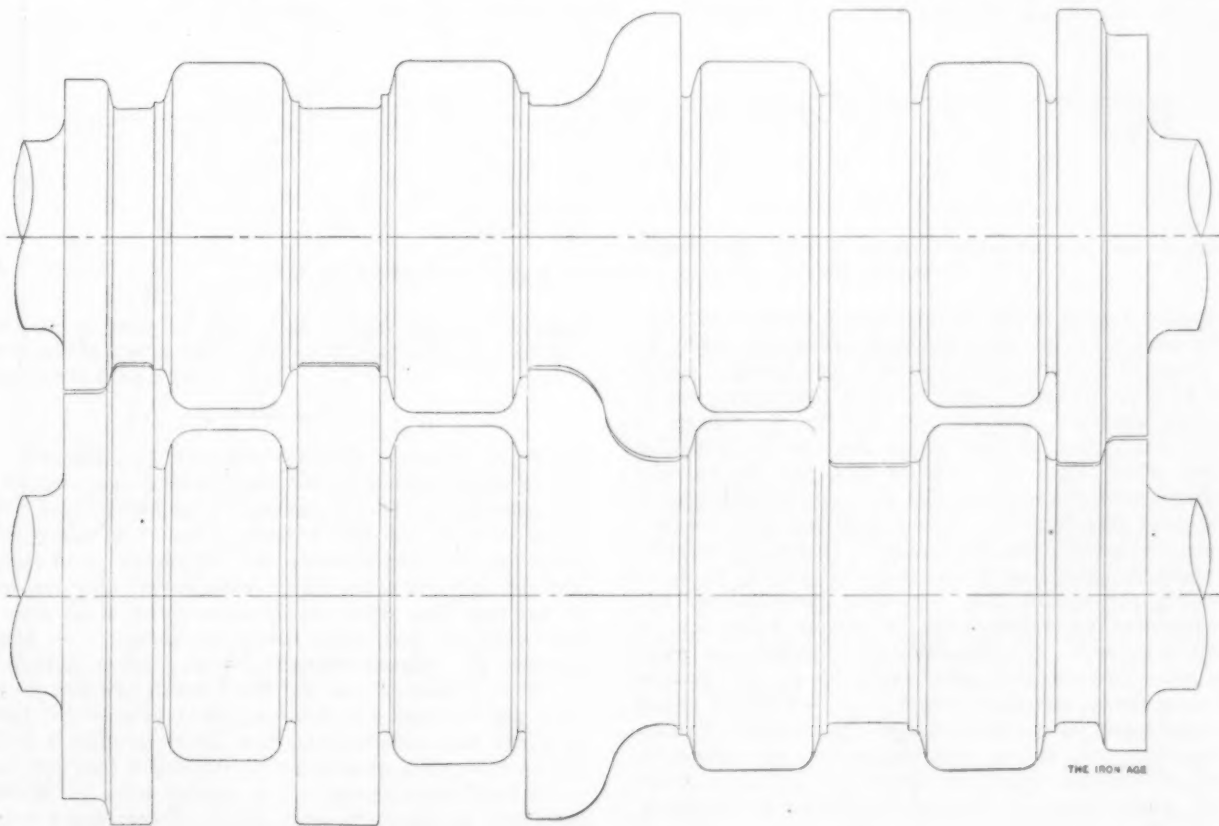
Rolling Beams in a Rail Mill.—Scale, $\frac{3}{4}$ Inch to 1 Foot.
